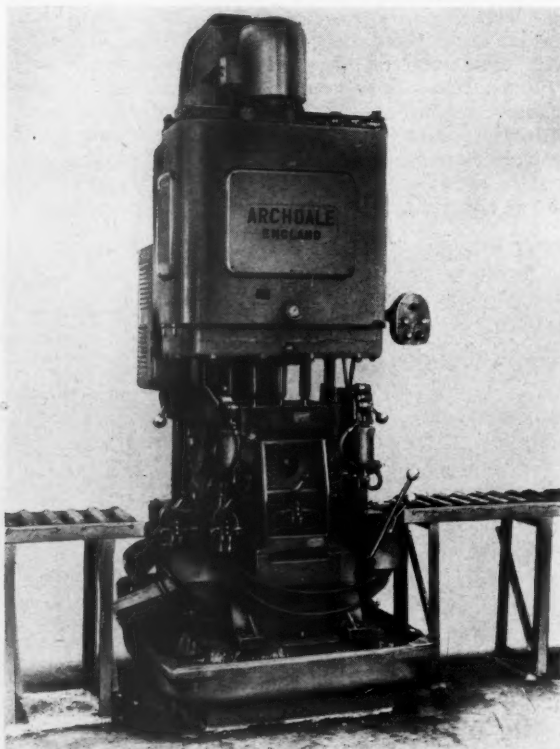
Set-up for drilling the push rod holes. The machine has a special work cycle.
